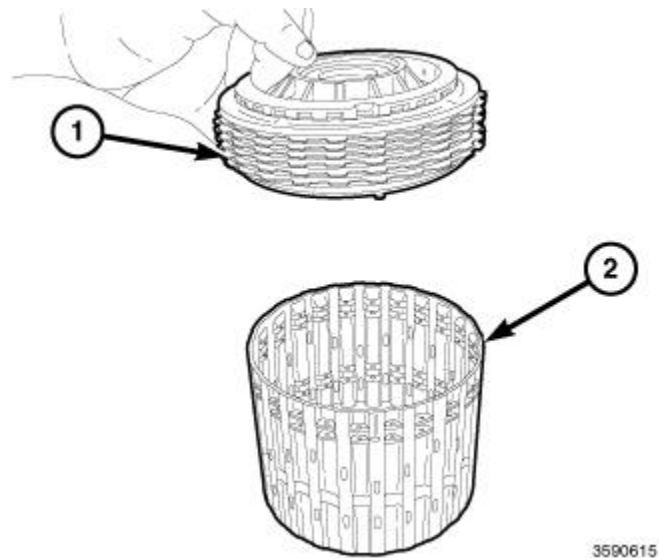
C-Clutch & P4 Sun Gear/C/E Clutch Retainer
